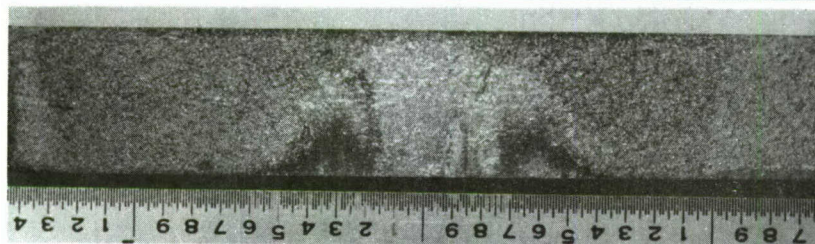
Fracture Surfaces of 7475-T7351 da/dN Surface Flaw Specimens
